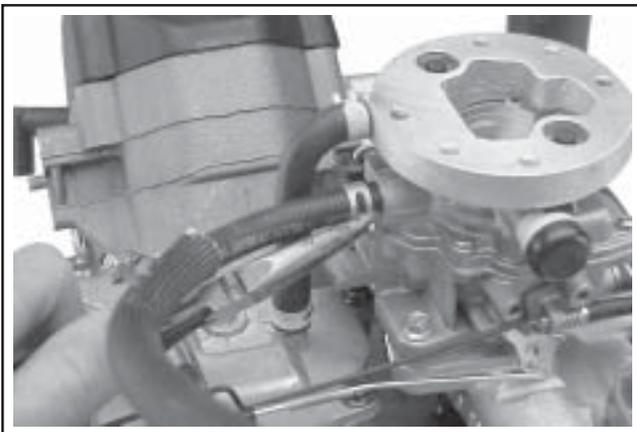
Connecting Fuel Line (Mechanical Fuel Pump).
